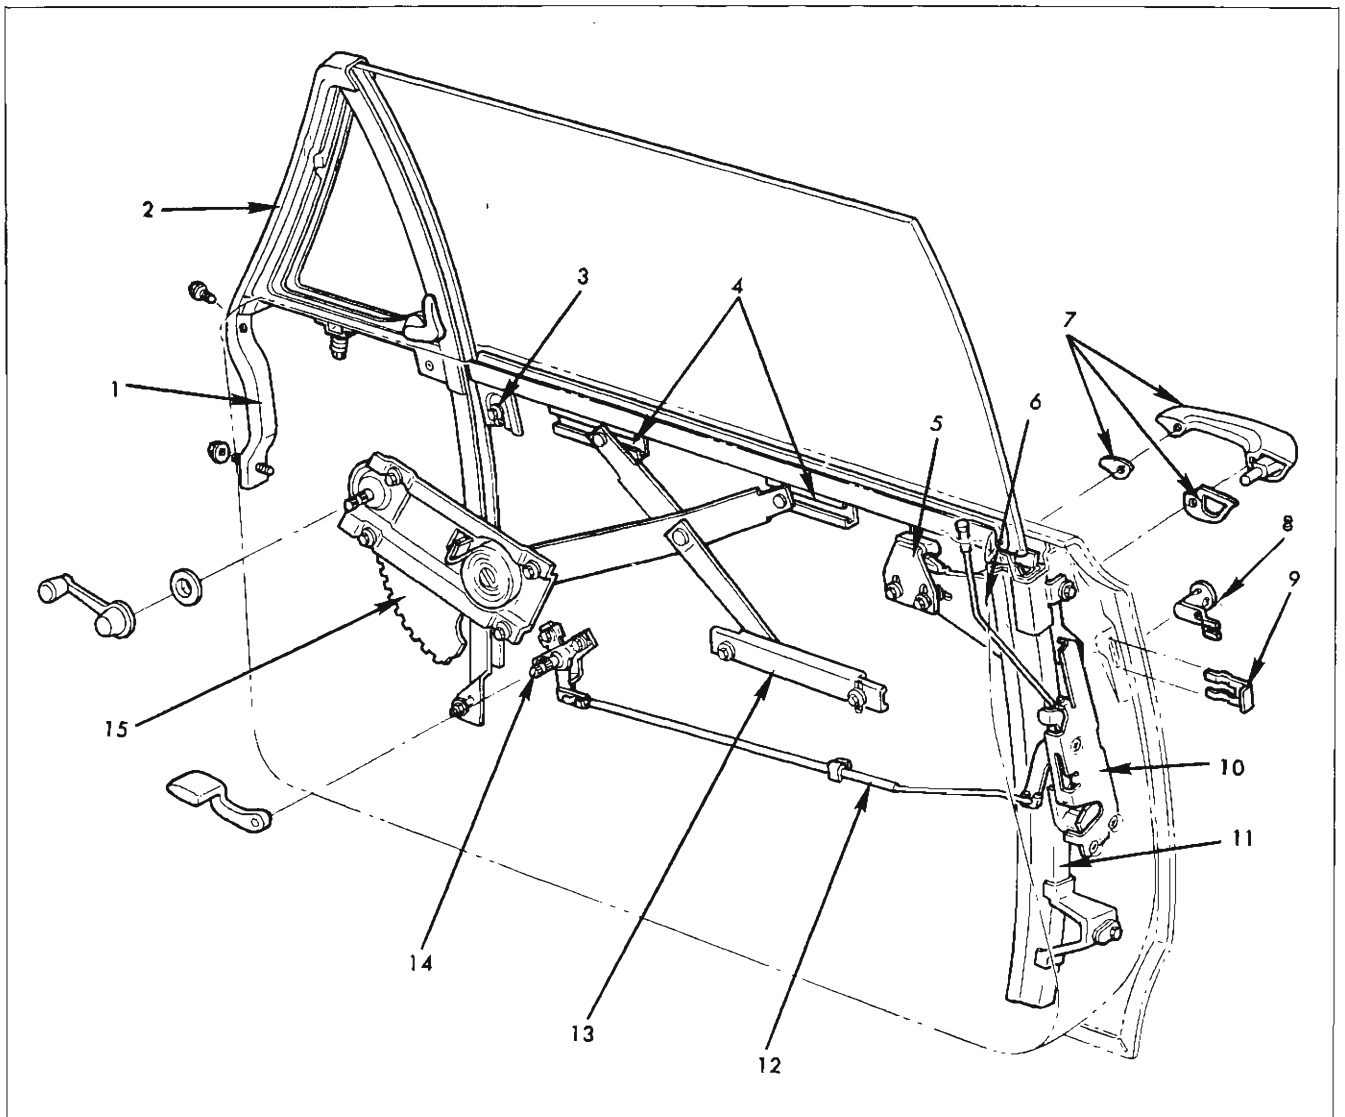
Typical Open Style Front Door - Trim and Inner Panel Water Deflector Removed
